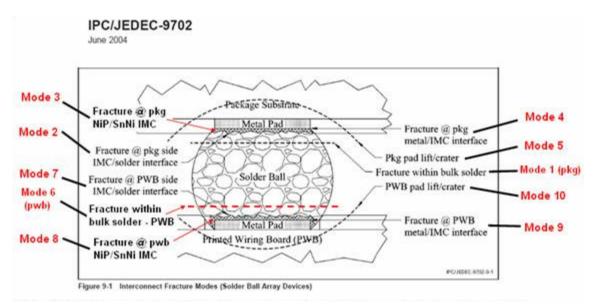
Interconnect Fracture Modes (Solder Ball Array Device) IPC 9702.
